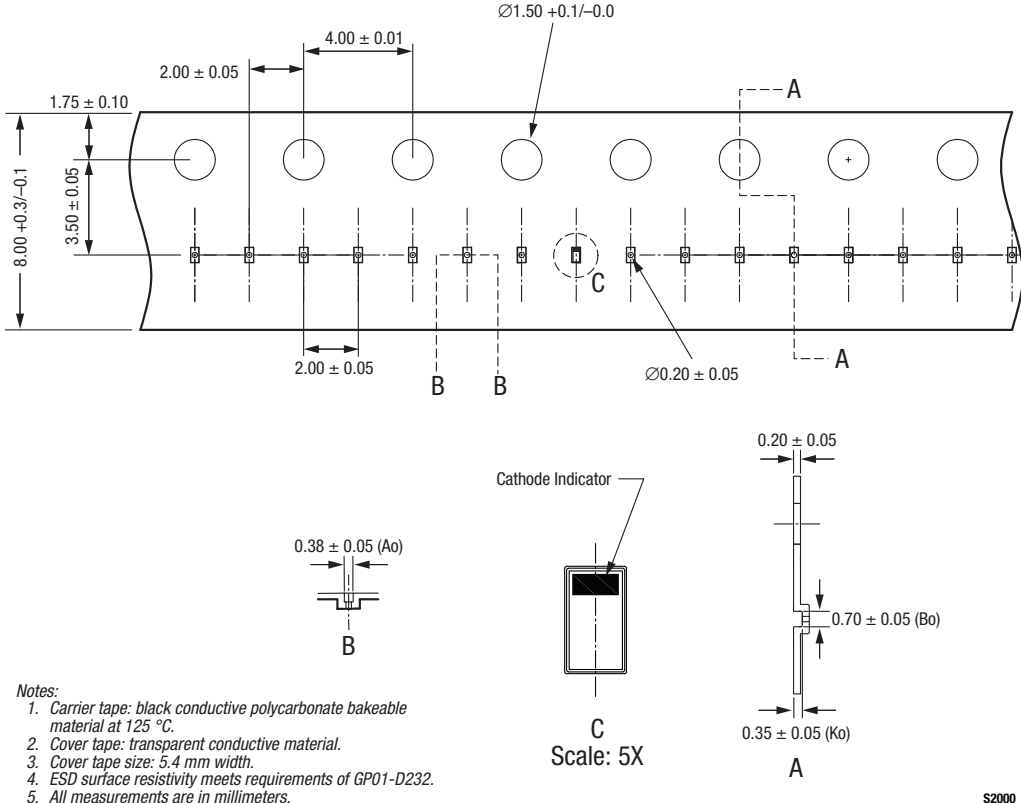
SMSA7621-060 Tape and Reel Dimensions
